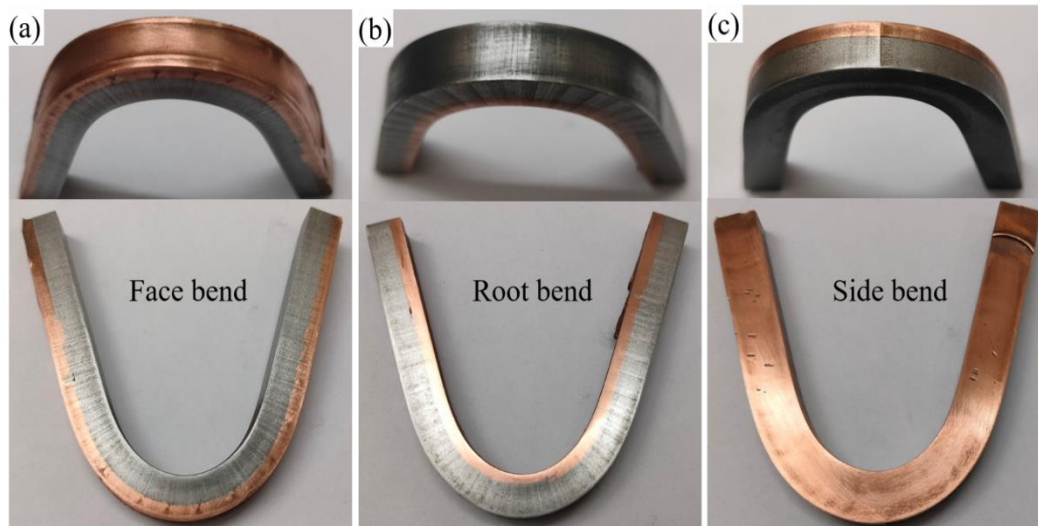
Guided bend test results (a) face bend (b) root bend and (c) side bend
